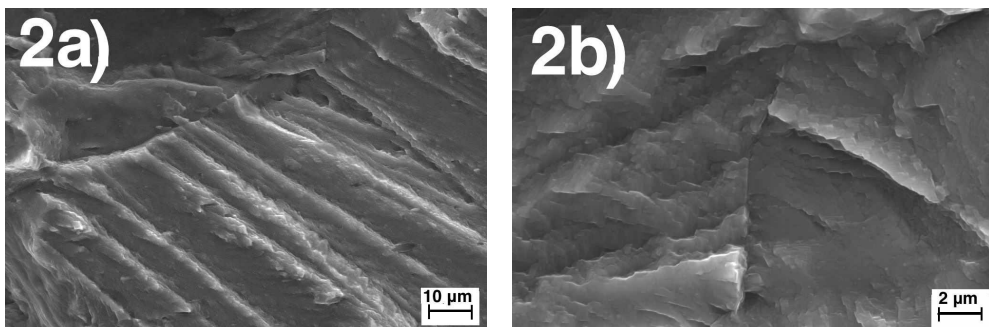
Fracture surface of AA6082.50-T6 base material. Slip bands shown to the left (2a.).
